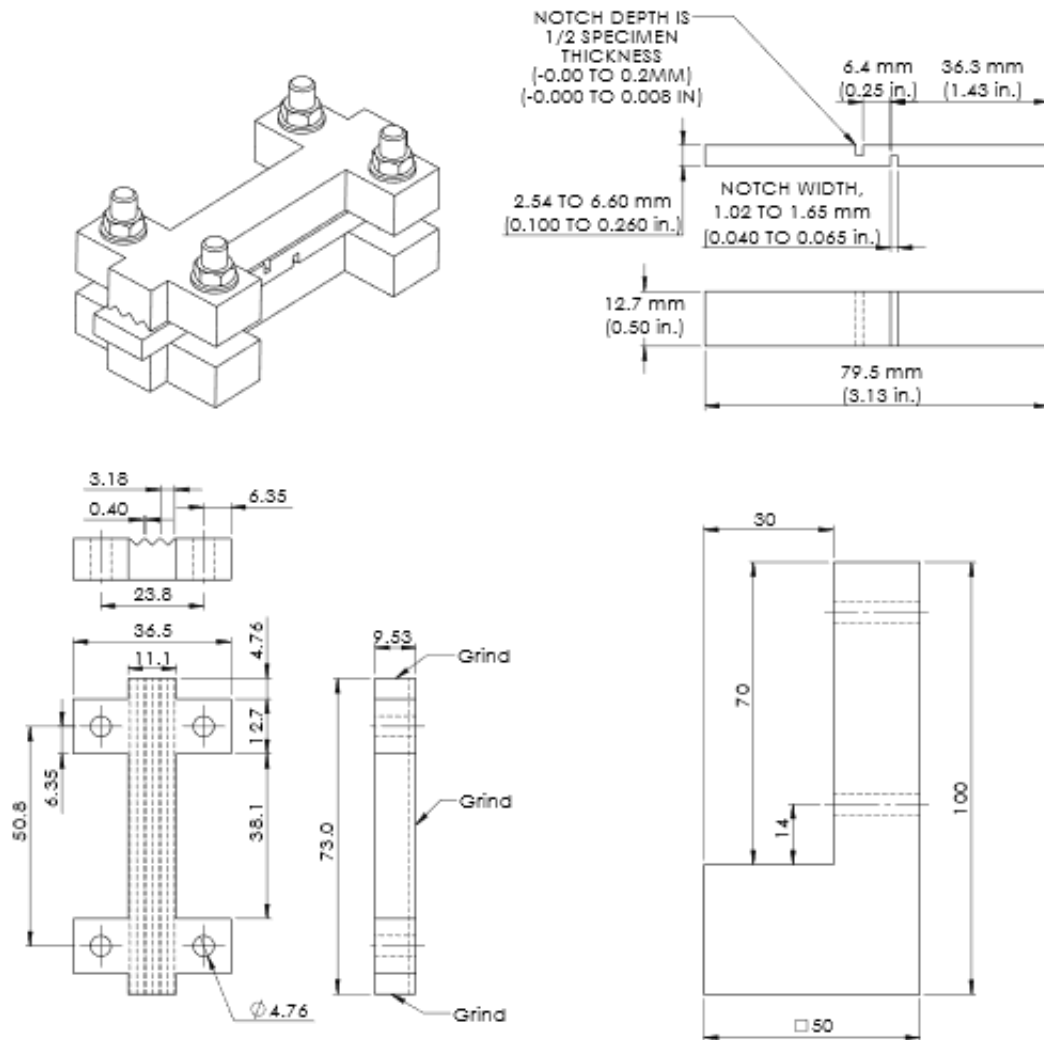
The double notch sample and support jig [24, 25] (machining tolerance $\pm 0.2\text{mm}$ where not indicated)
